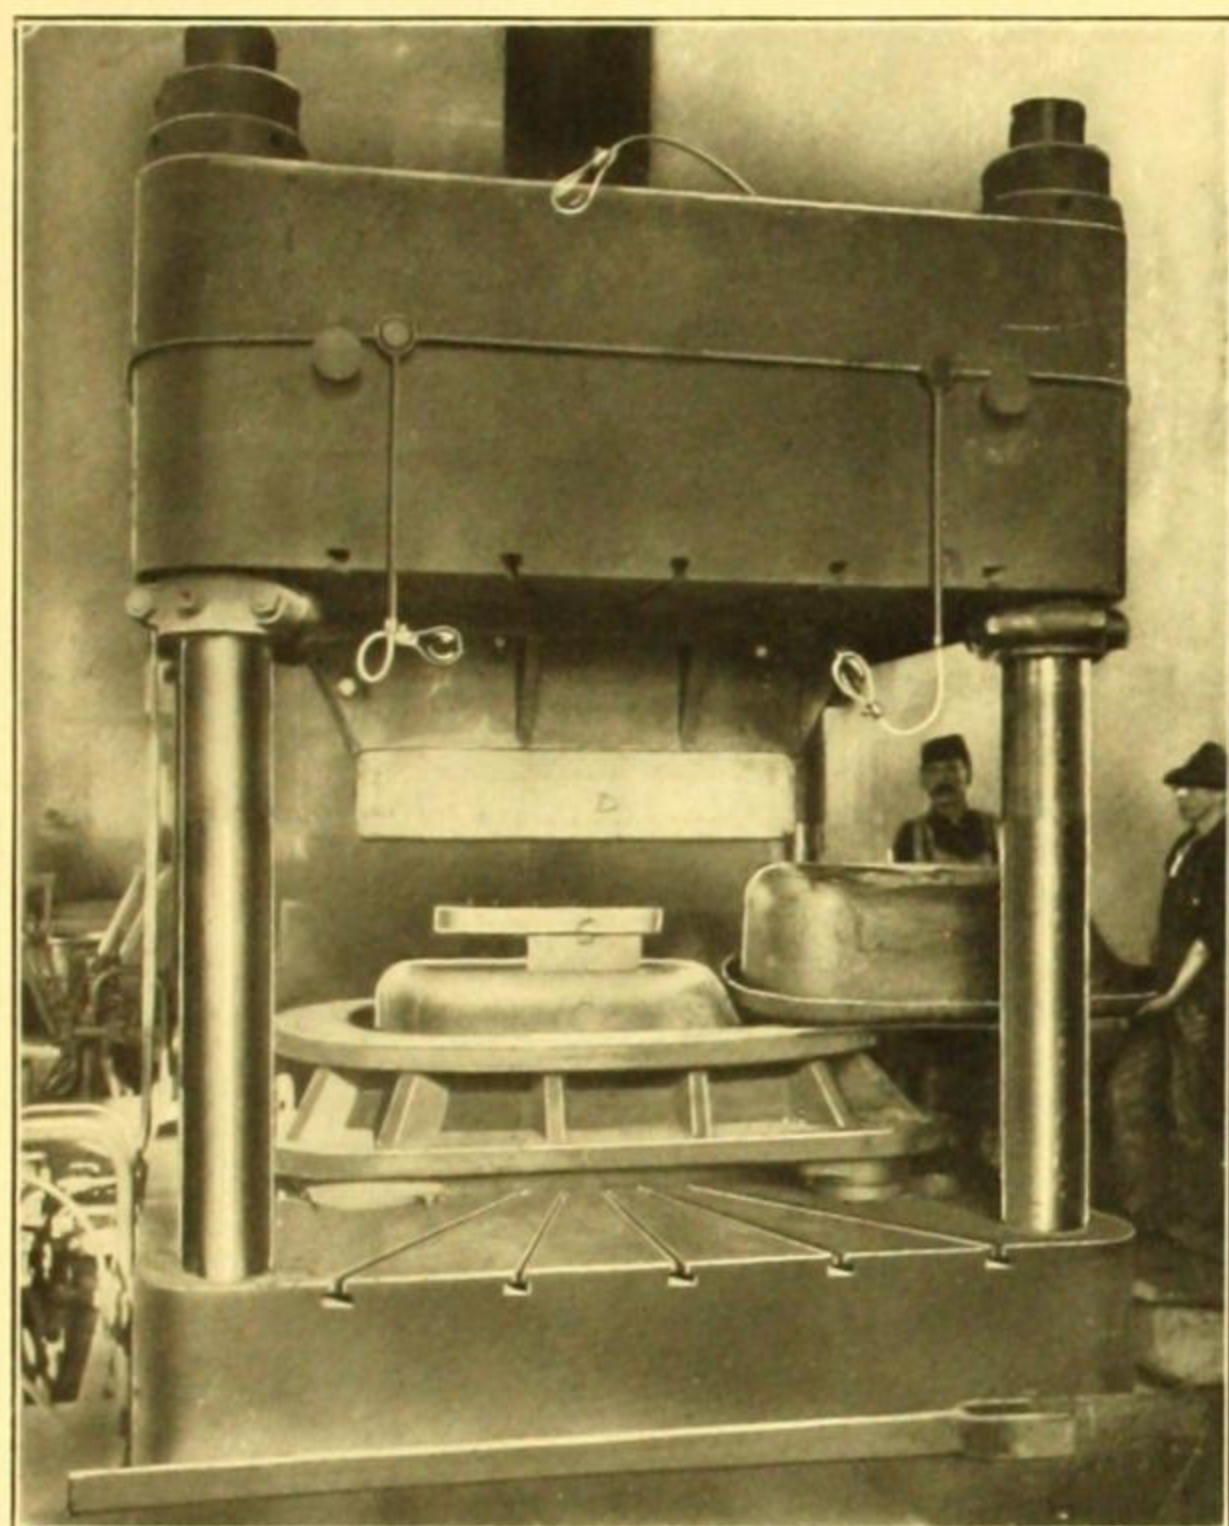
One of the Drawing Presses, Showing the Arrangement of Dies Used for the Final Drawing Operation.
